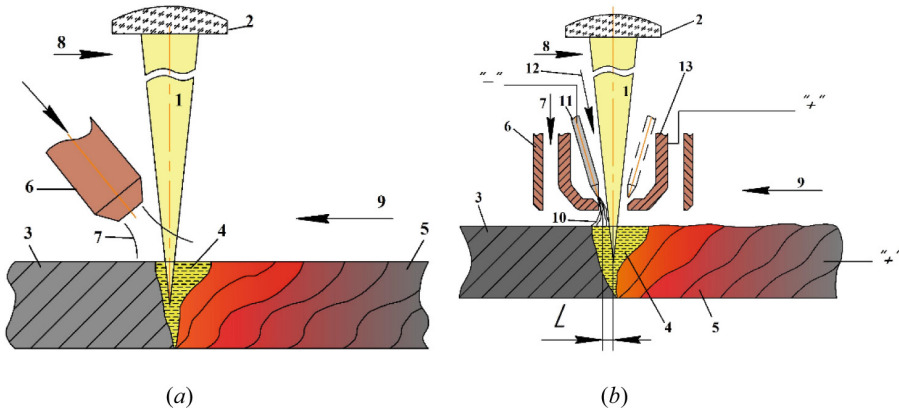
Scheme of laser (a) and hybrid laser-plasma (b) welding: 1 – laser radiation; 2 – lens; 3 – base metal; 4 – welding pool; 5 – weld metal; 6 – protective nozzle; 7 – protective gas; 8 – gas protection of the lens; 9 – direction of welding; 10 – welding arc; 11 – non-consumable electrode; 12 – plasma gas; 13 – plasma nozzle; L – distance between the conditional point of the anode spot center and the laser radiation axis.
